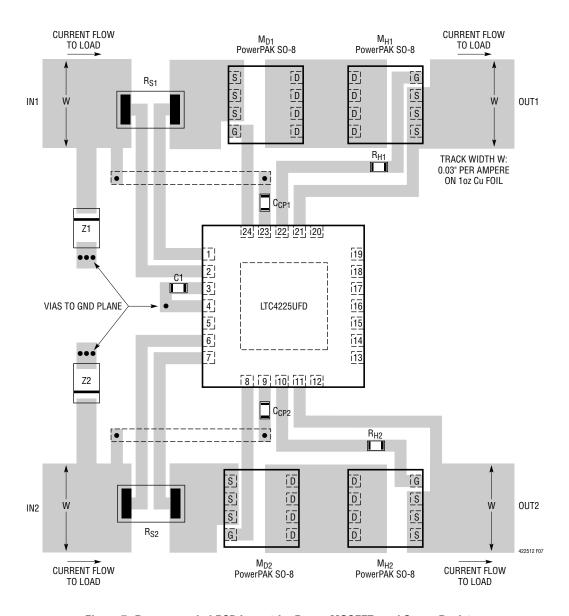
Recommended PCB Layout for Power MOSFETs and Sense Resistors
